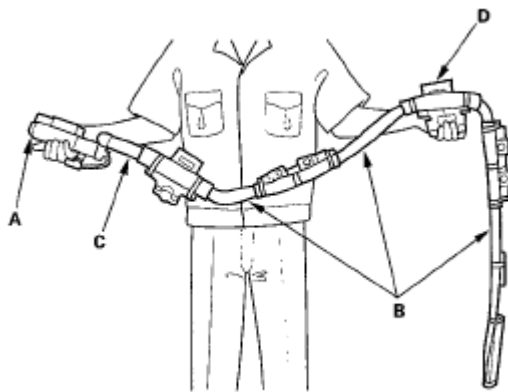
Precaution - Never Handle Flexible Bag Or Adapter Pipe
